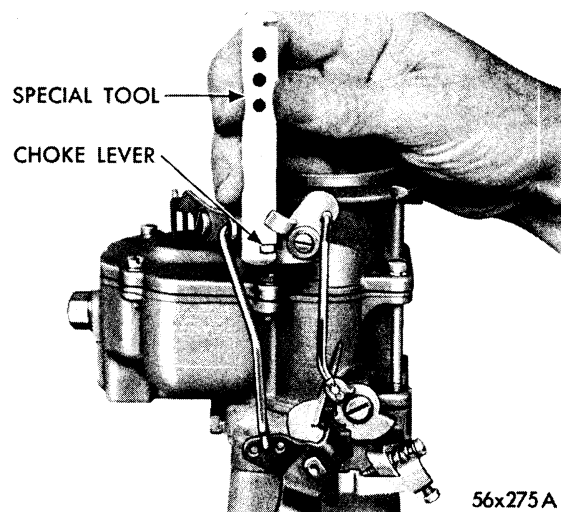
Bending Choke Lever for Correct Fast Idle Cam Setting
